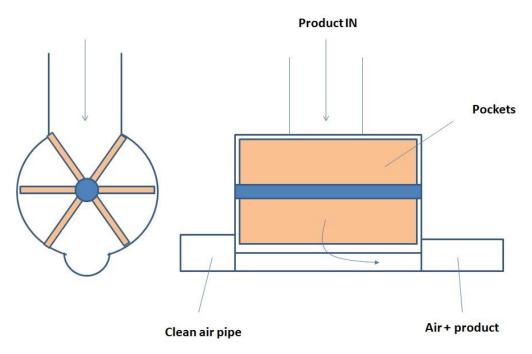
Blow Through Rotary Airlock Valve (Rotary Airlock Valve - an Engineering guide (Design, Calculation), n.d.)
